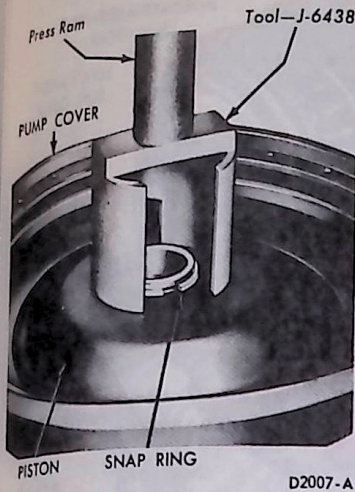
Torque Converter, Lockup Clutch and Front Pump
